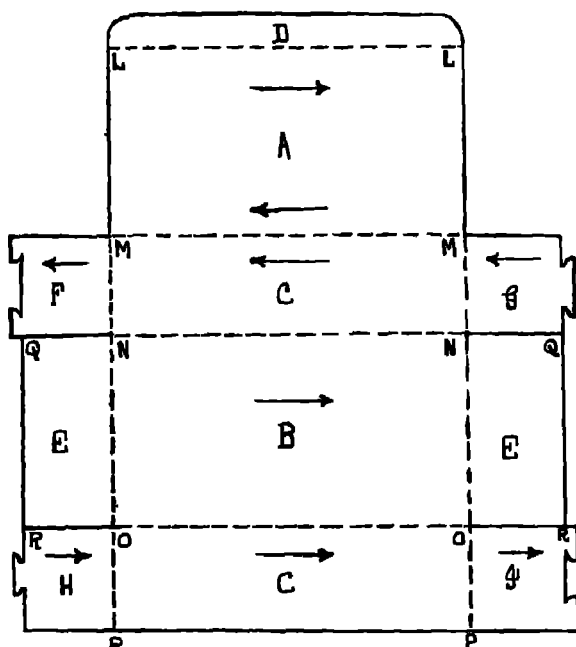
SINGLE-PIECE DENTAL PASTE DISPLAY BOX.
